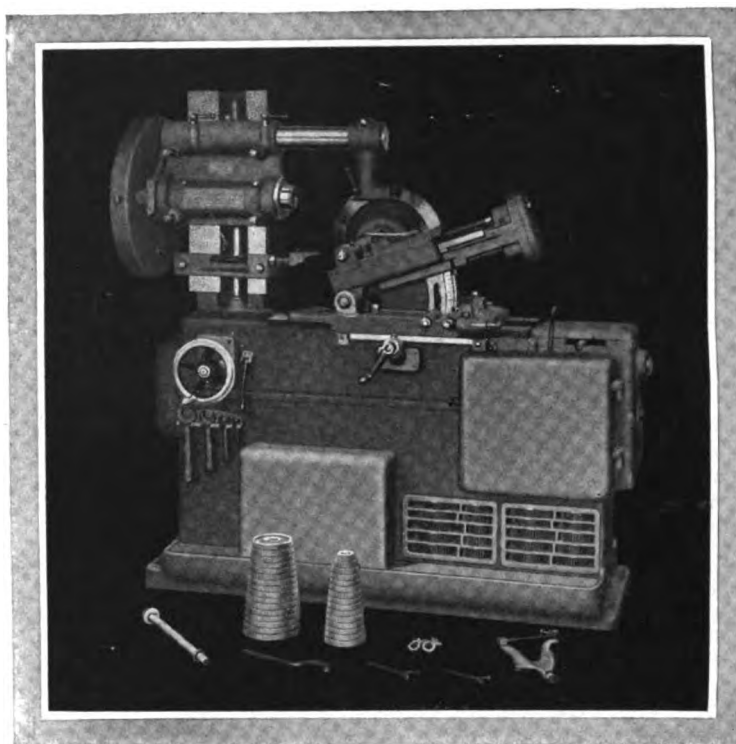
No. 13 Automatic Gear Cutting Machine for Spur and Bevel Gears
